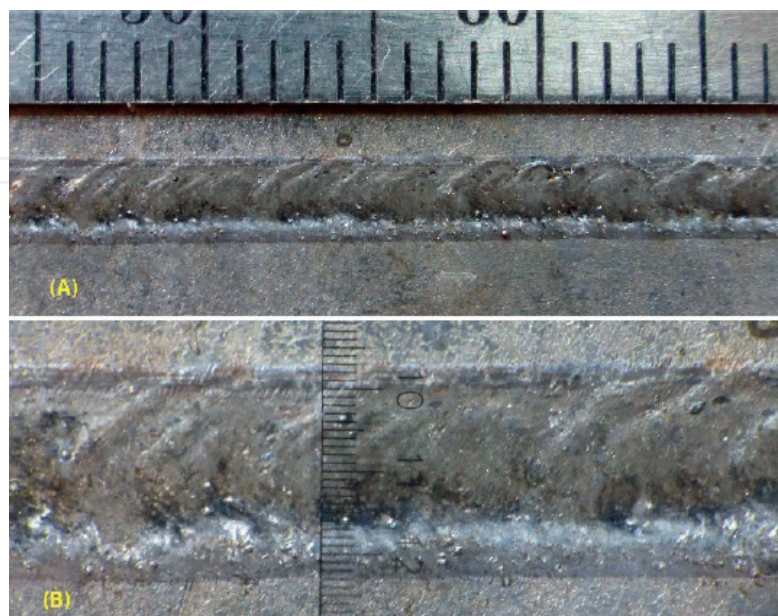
Top view of a laser-generated coating on weld bead [26].
